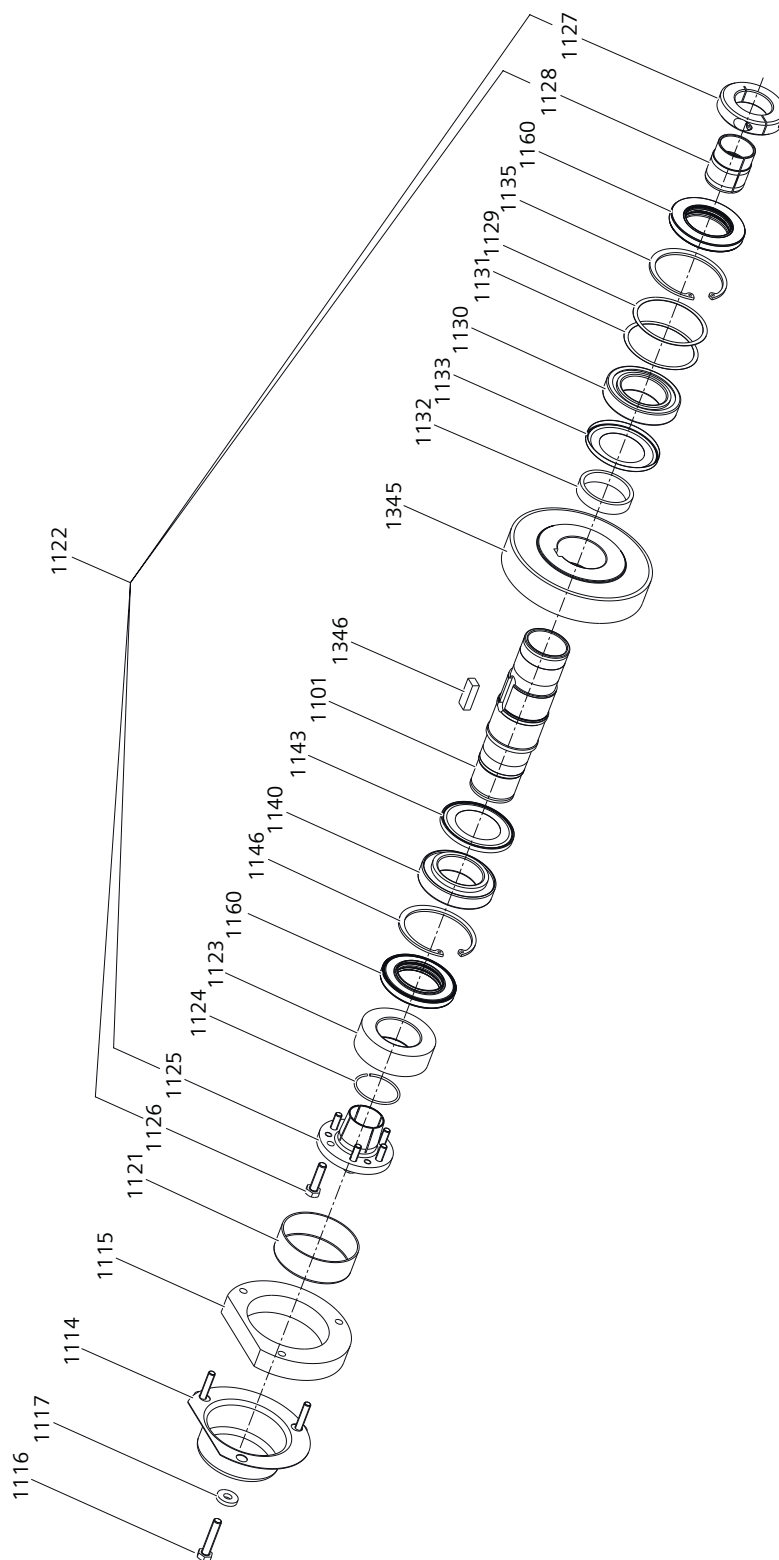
SIMOLOC assembly system, sizes 29 - 89
